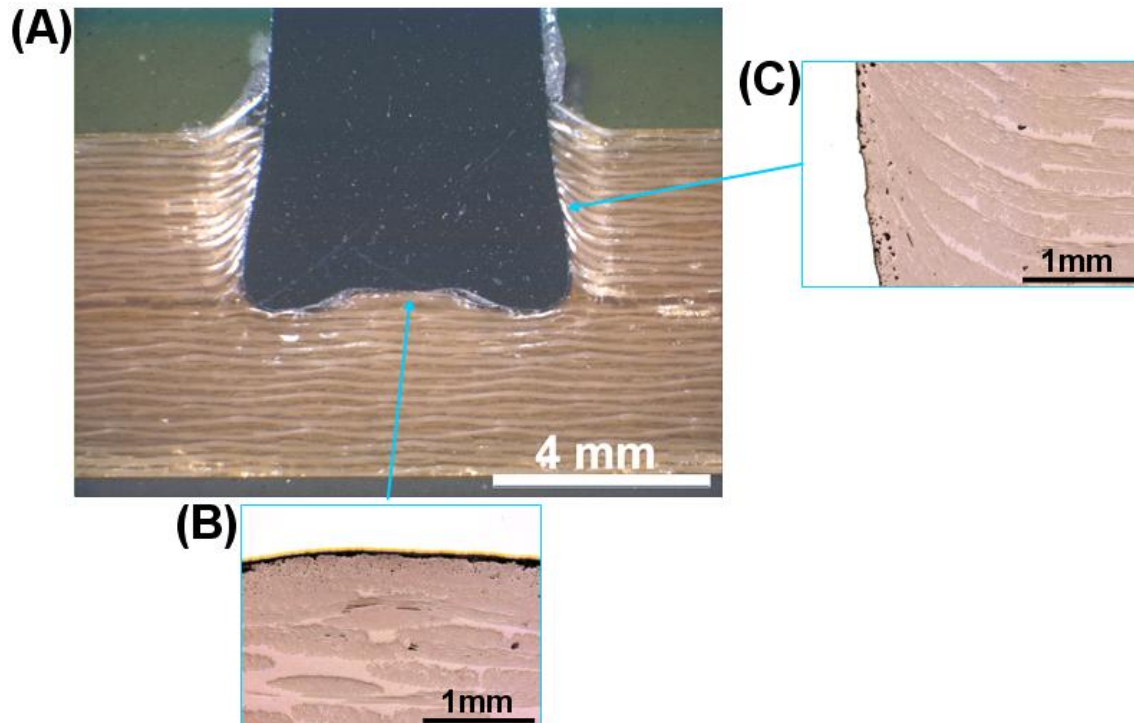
(A) Example of a cross-sectional view of a friction-riveted PEI-GF/Ti gr.2 joint; (B) and (C) details of the volumetric thermal flaws around the rivet.
